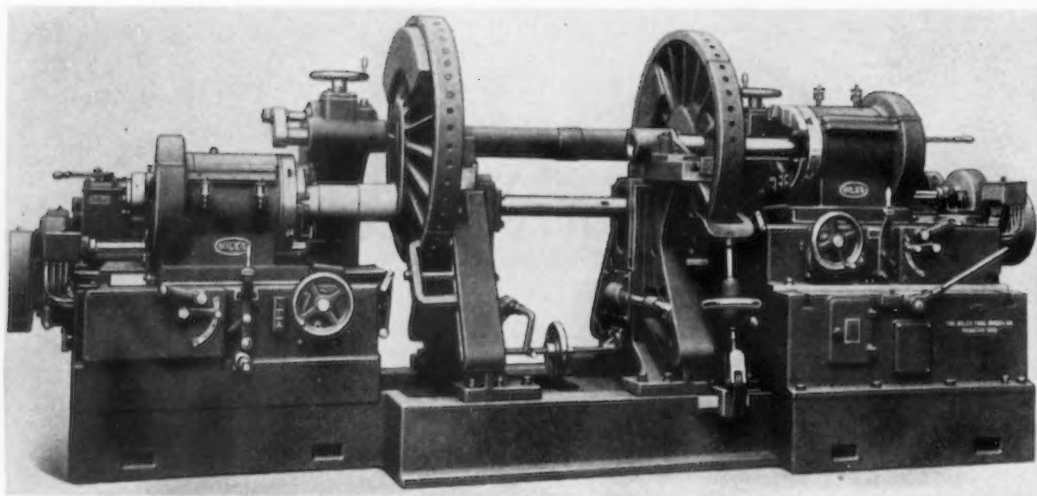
Crank pin turning operation on a left-hand wheel and boring operation on right-hand wheel. The machine is a 90-in. quartering and crankpin turning unit.
